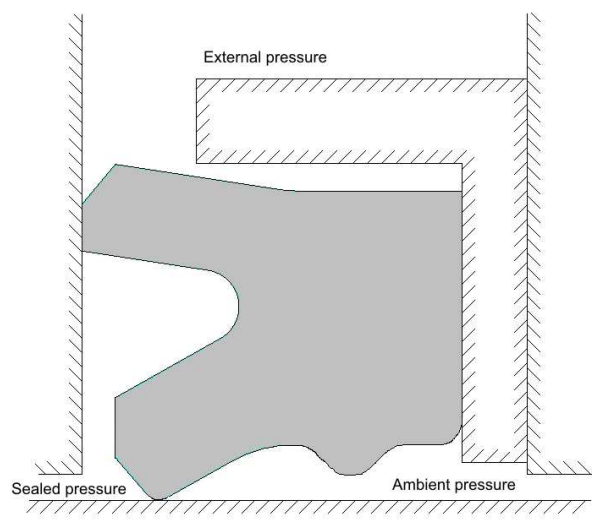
Assembled active seal housing block with double-lip sealing element
